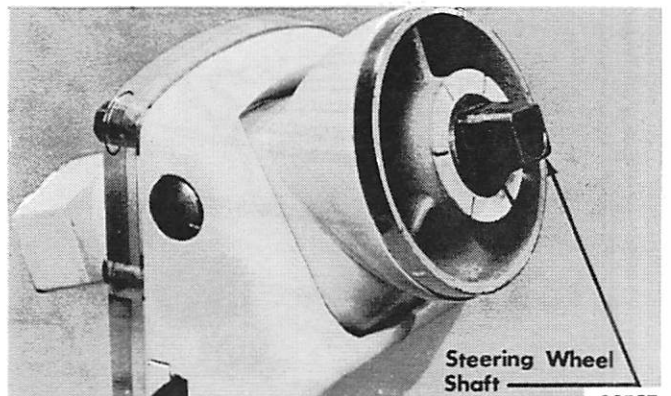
Tilt Mount Steering Wheel Shaft Installed
